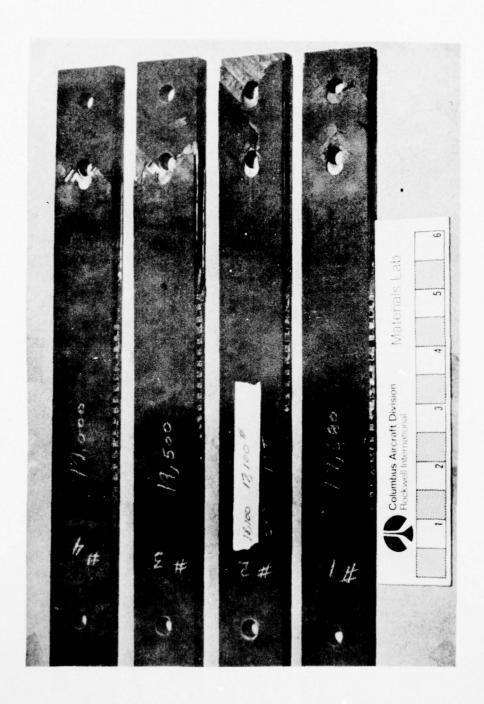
FAILED & AXIAL LOAD SPECIMENS
